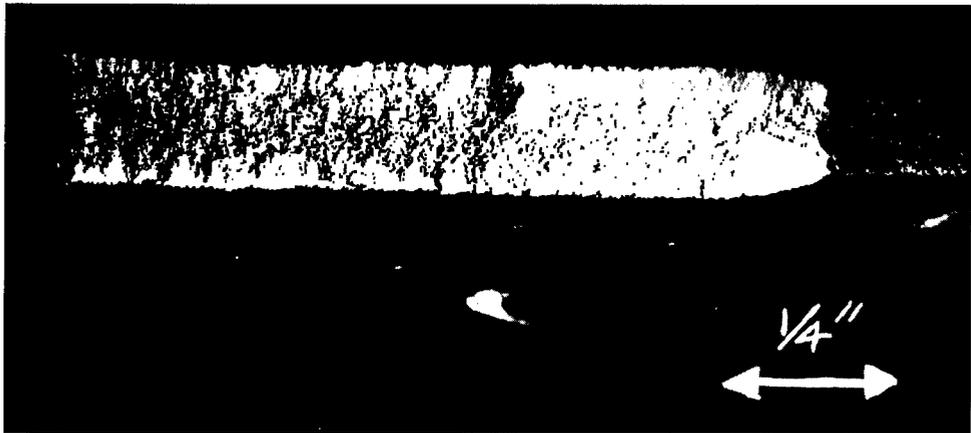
Fully oblique (full-shear) macroscopic fracture mode
